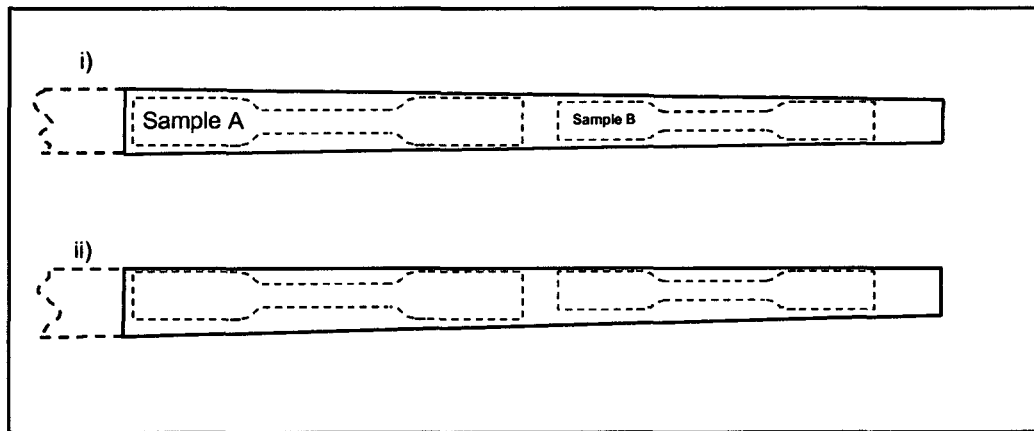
Test bar i) plan view, ii) side view, showing tensile specimen locations within. Sample A is 1.4 in. gauge length, 0.350 in. diameter; sample B is 1 in. gauge length, 0.250 in. diameter.
